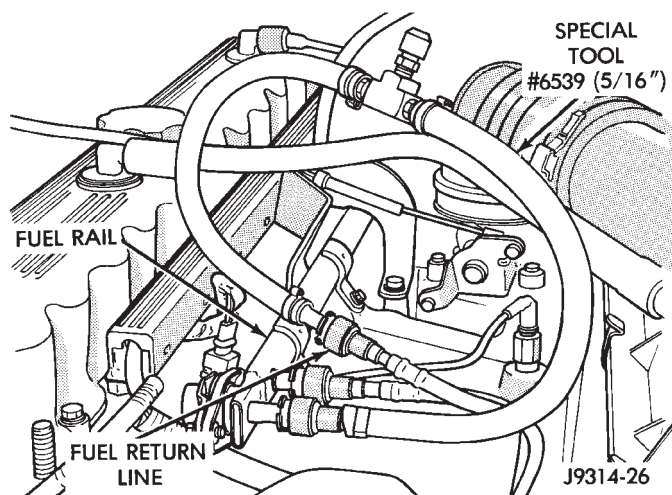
Removing Quick-Connect Fitting—5.2L Engine
